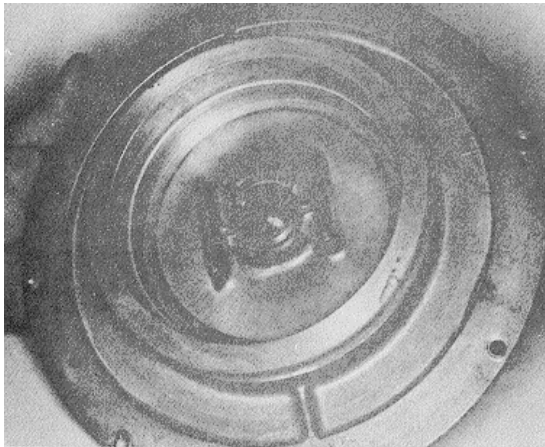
, T5-37. Installing oil sleeve assembly in oil seal/diffuser plate
